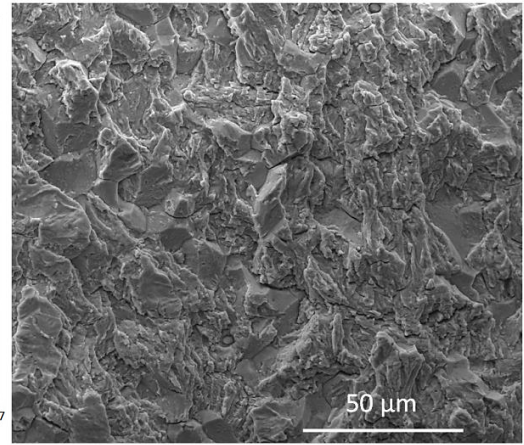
Fracture surface covered with intergranular facets after biaxial tension fatigue at $R = 0.25, B = 1$.
